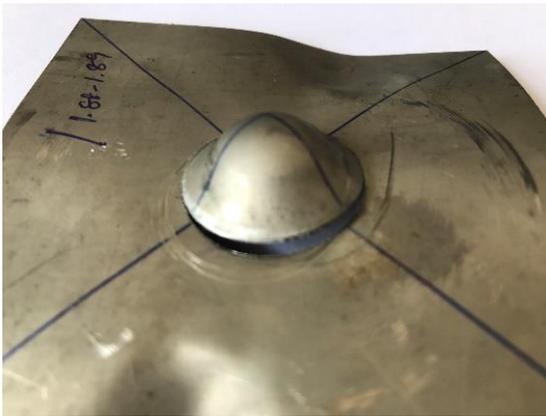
FRACTURE IN 0.5 mm THICKNESS SHEET-DRY CONDITION
